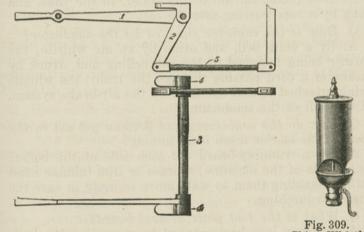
Whistle Work. Chime Whistle. 1. Lever. 2. Arm or Crank. 3. Shaft. 4. Shaft-bearing. 5. Link. Q. How many tons of coal would a pit of the following dimensions hold: Length, 9 feet; width, 4 feet; depth, 3 feet 3 inches?
